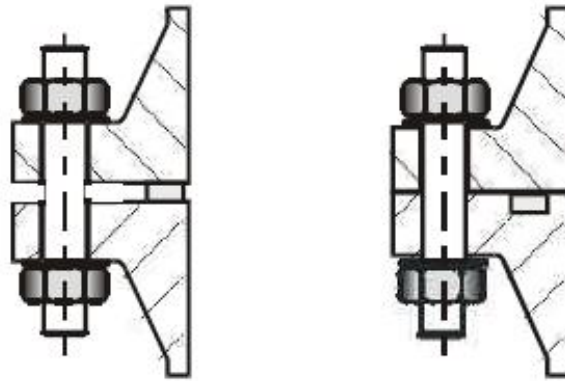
flange type with floating gasket (left) and flange type with metal-to-metal contact (right)
